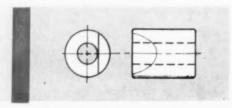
The shape of the clamping surface of the design in Fig. 9 is shown here.
